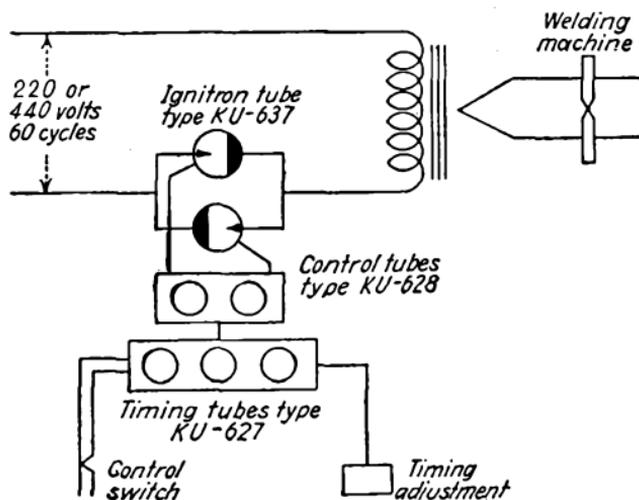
Layout of equipment using ignitron timer for spot welding.
